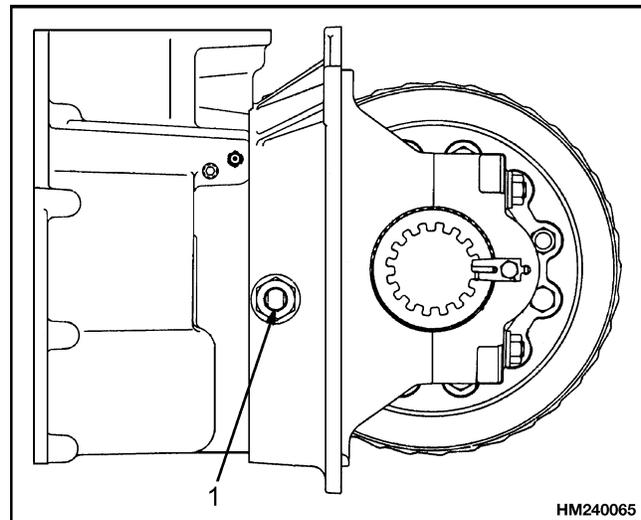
Clearance Check Between Ring Gear and Pinion
